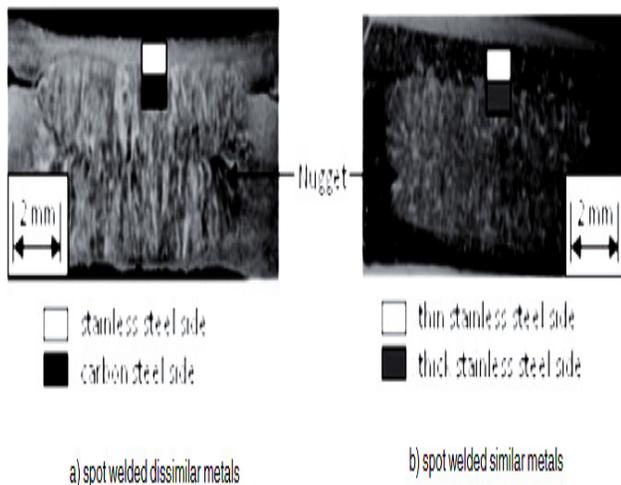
Interface of spot welded similar and dissimilar metals [10].
